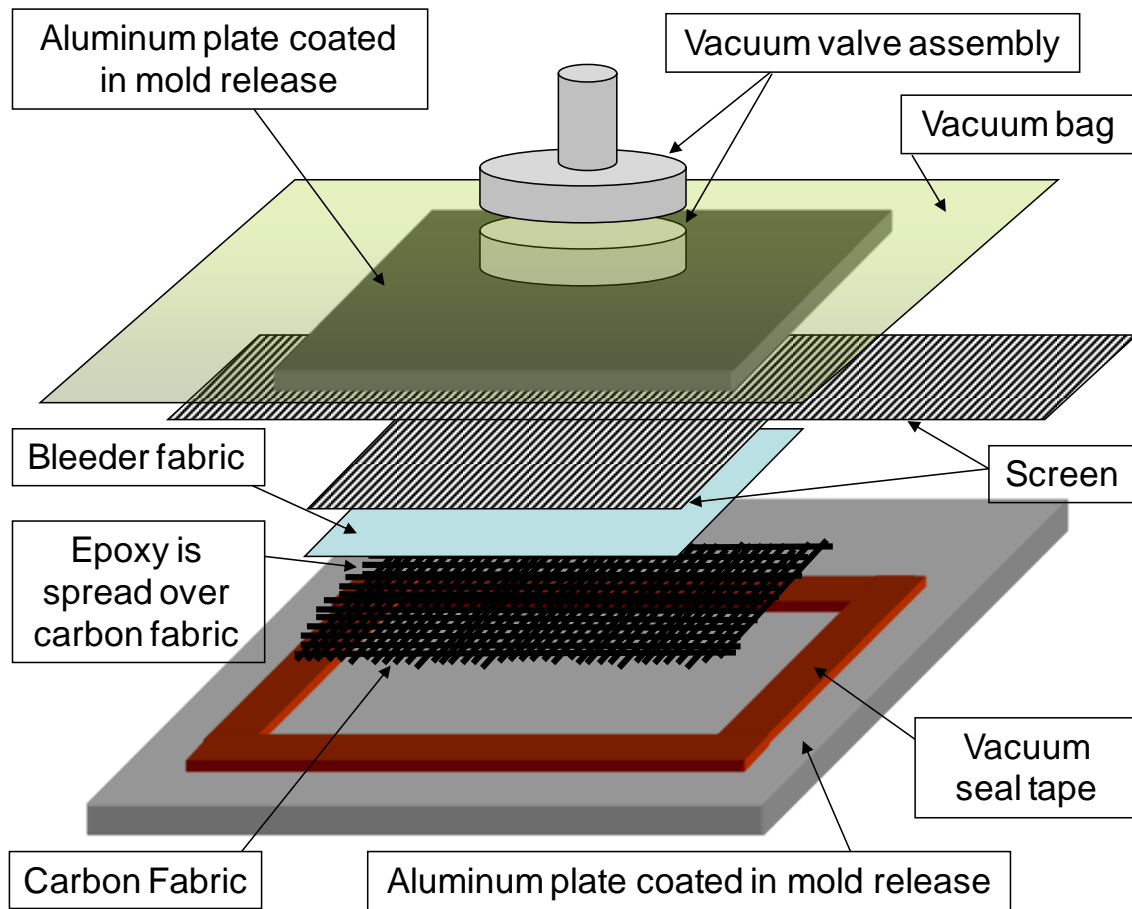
Schematic of hand lay-up method used for fabricating carbon fiber polymer composites.
